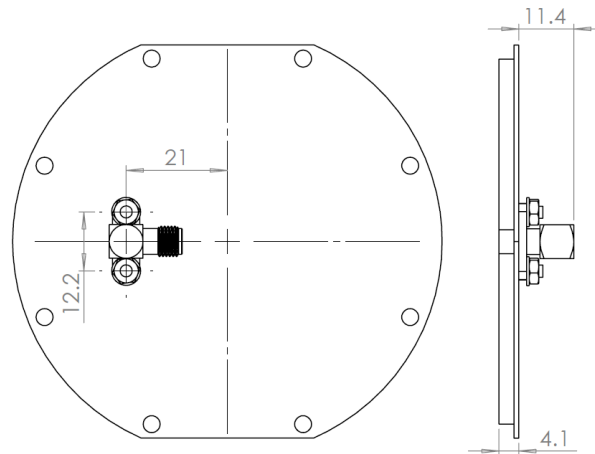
SANT Dimensions – Viewed from below and from the side with a right angled SMA connector
